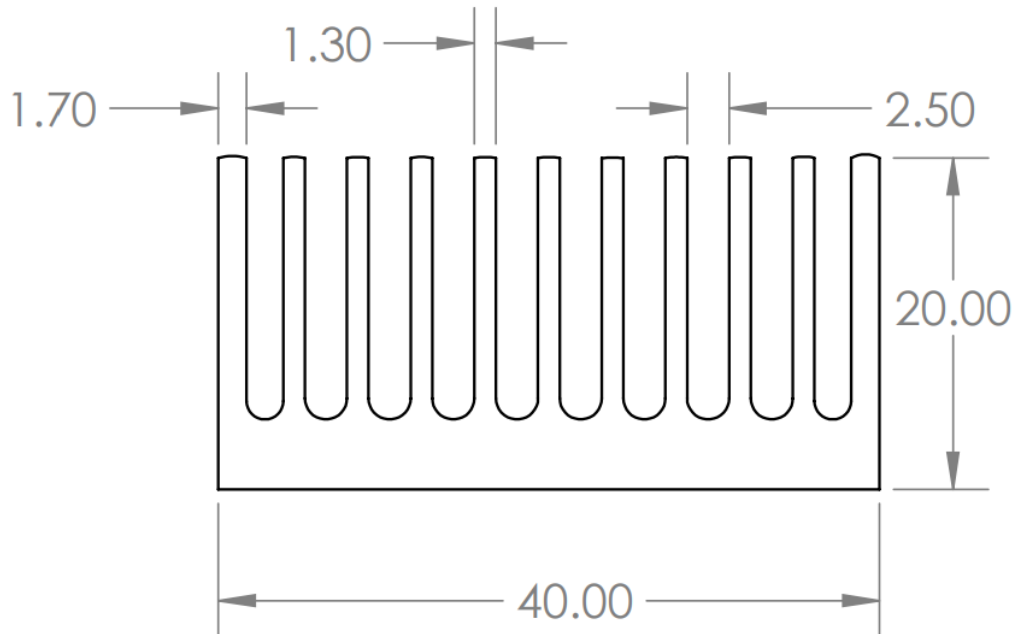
40×40 mm heat sink schematic (dimensions in millimeters)
